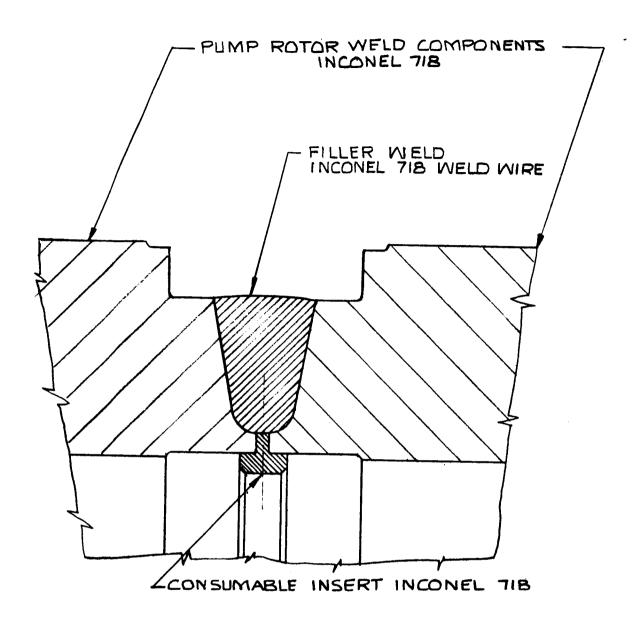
Weld Joint Configuration and Consumable Insert
